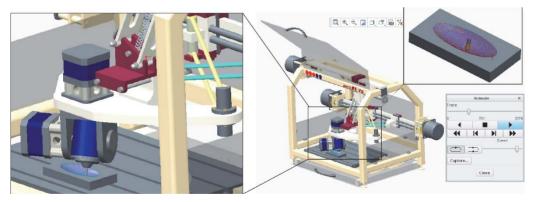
Example of the simulation of the virtual prototype machines during the machining of workpiece having the ellipsoidal shape
